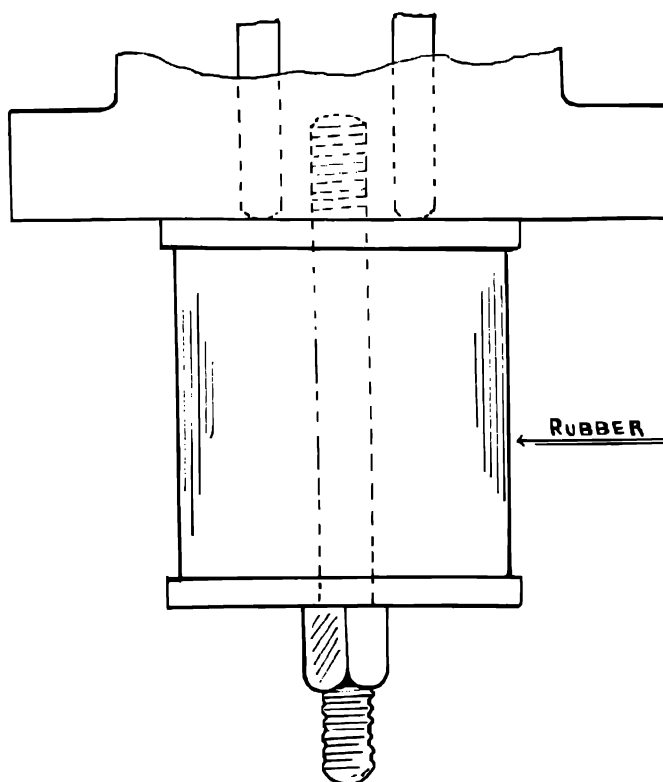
Rubber buffer for bending, used when bending heavy-gauge metal.
